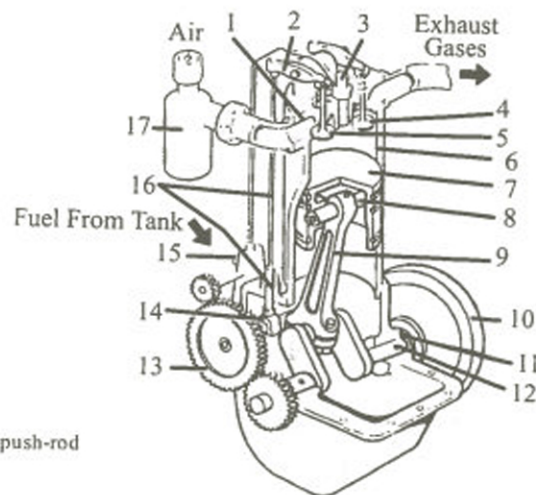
Schematic Diagram of a Single Cylinder Diesel Engine.
